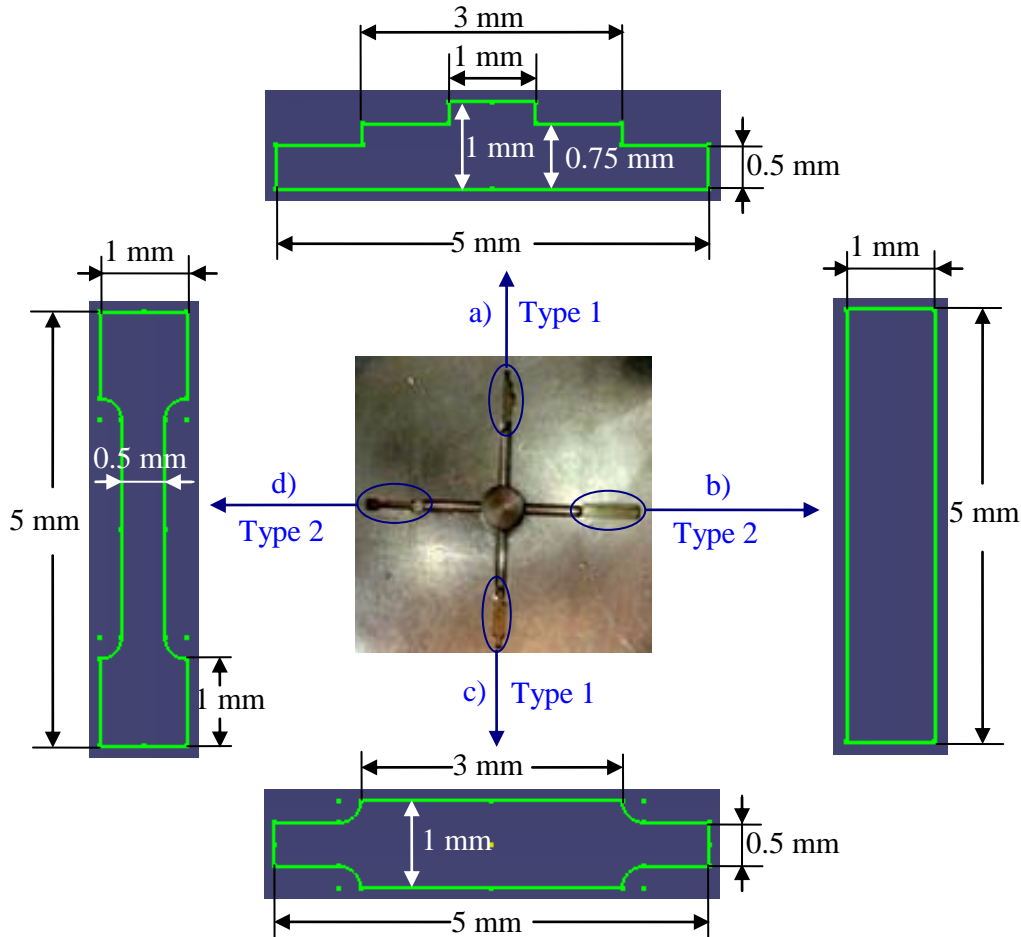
Injected specimens from the involved two-plate mold without external defect
